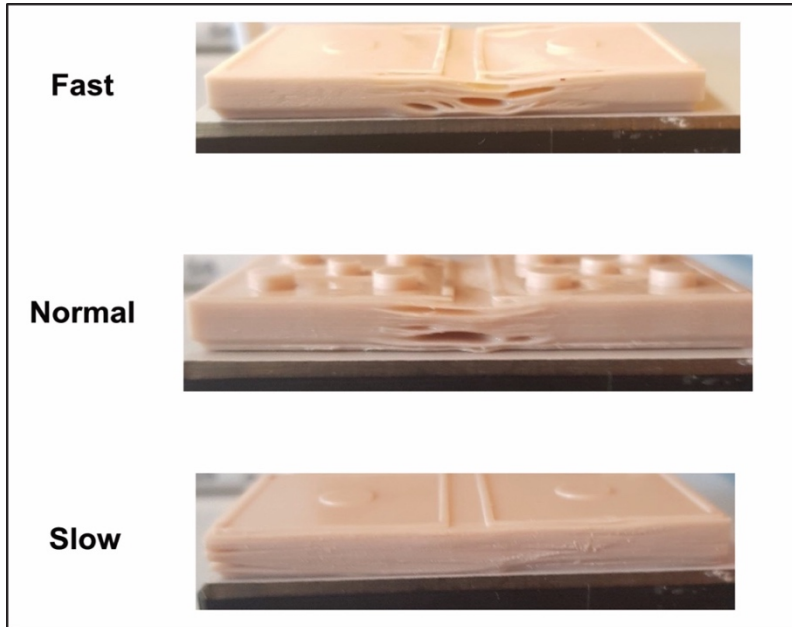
Print defect in the fabrication of the LOC device moulds caused by a fast manufacturing resulting in impaired layer attachment. The same design was printed using the Miicraft printer and the GR-13 dental resin with different speed settings and results in the differential attachment of layers.
